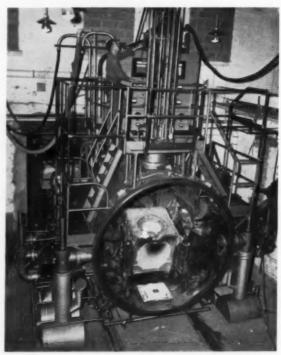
1000-lb furnace in open position showing crucible and control deck
